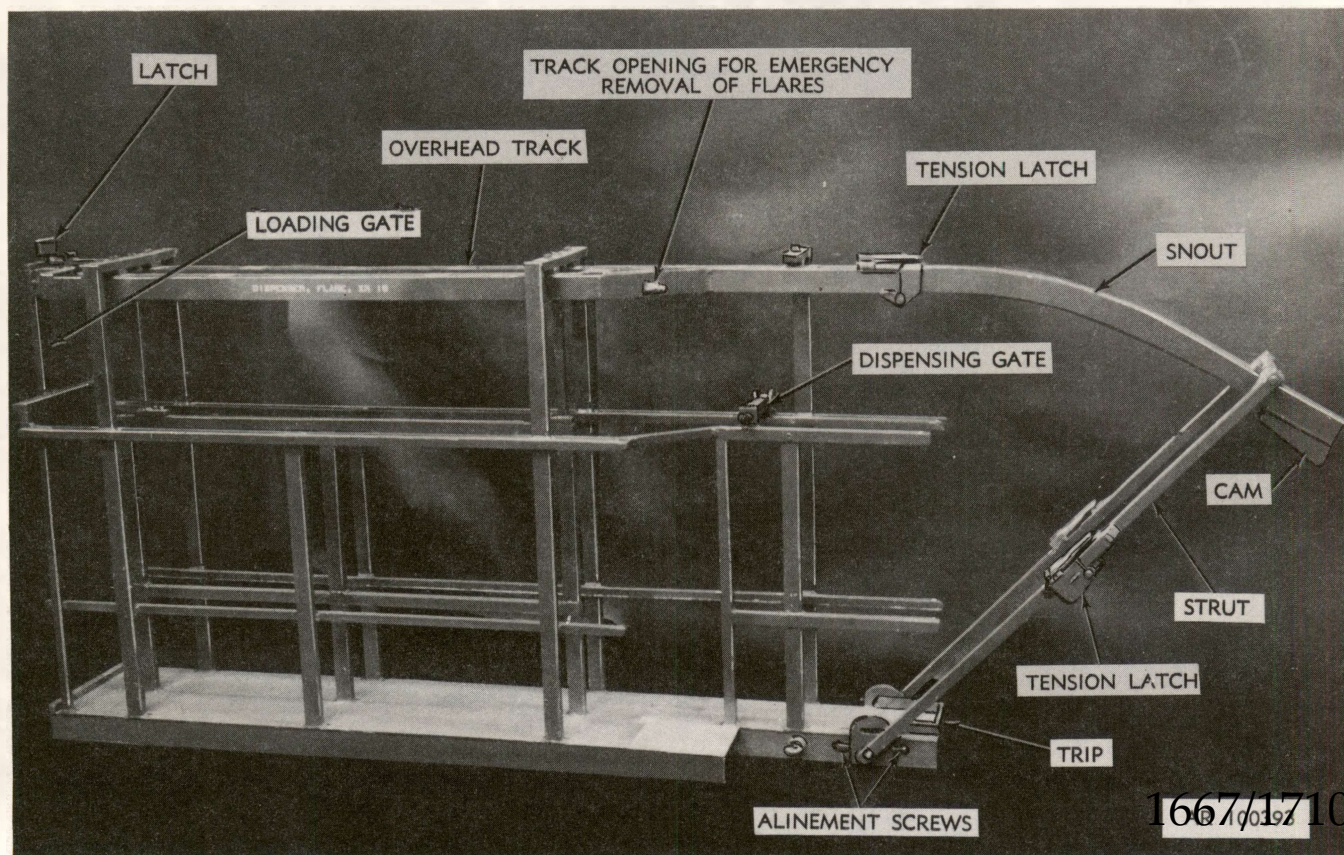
Dispenser assembly of flare dispenser XM19.
